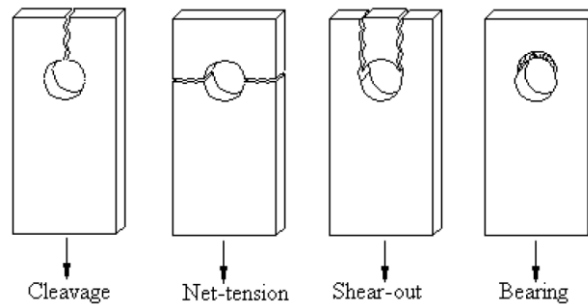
Bearing failure modes at drilled and fastened composites. Retrieved from (Pakdil et al., 2011, p.124)
